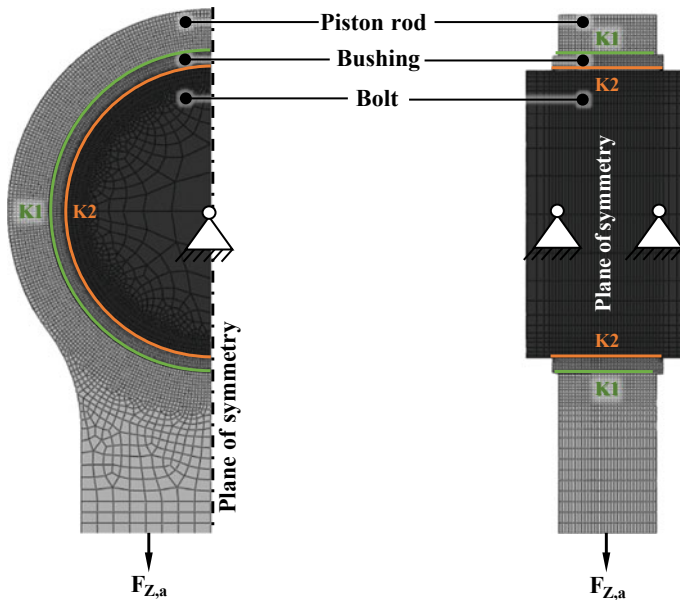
FE model of the piston-rod assembly with the contacts K1 (piston-rod-bushing contact) and K2 (bushing-bolt contact)
